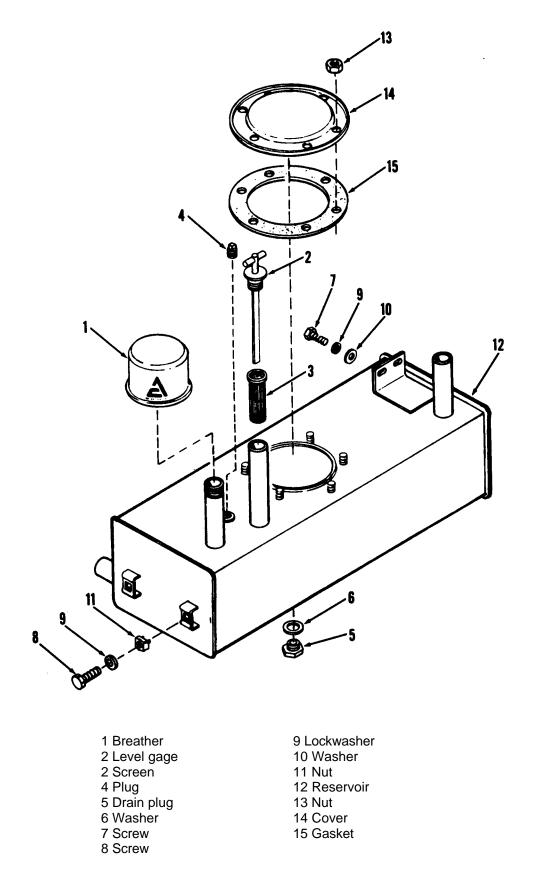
Hydraulic reservoir, exploded view. 4-37
